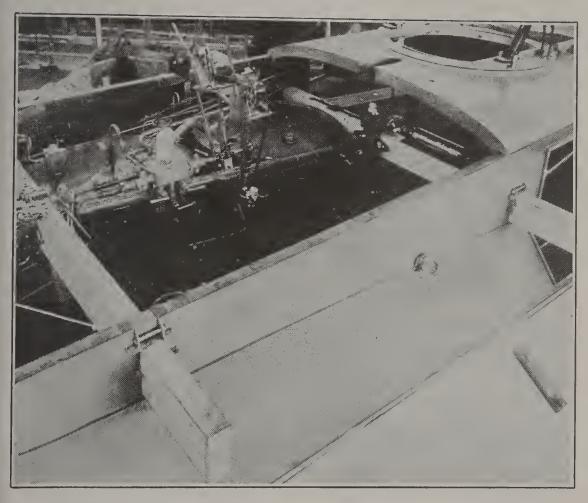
THREE-QUARTER VIEW LOOKING AFT OVER GASOLINE TANKS AND LOWER PIPING. READY FOR SHIPMENT.
